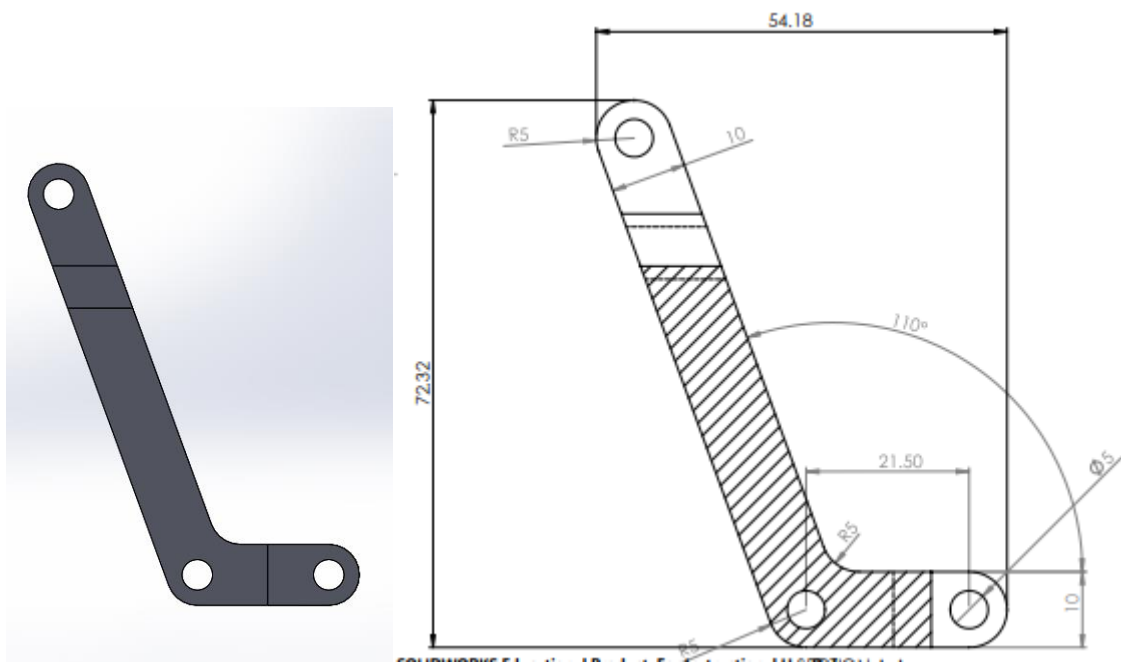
(a) Angle Shaft of the End effector 3D Drawing. Figure 3.5(b) Angle Shaft of the End effector 2D Drawing
